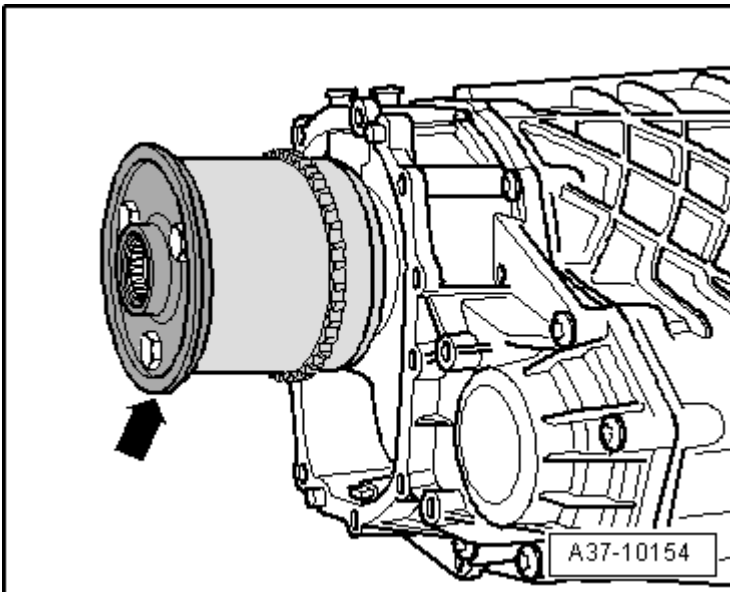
Removing/Installing Torsen Differential At Input Shaft
